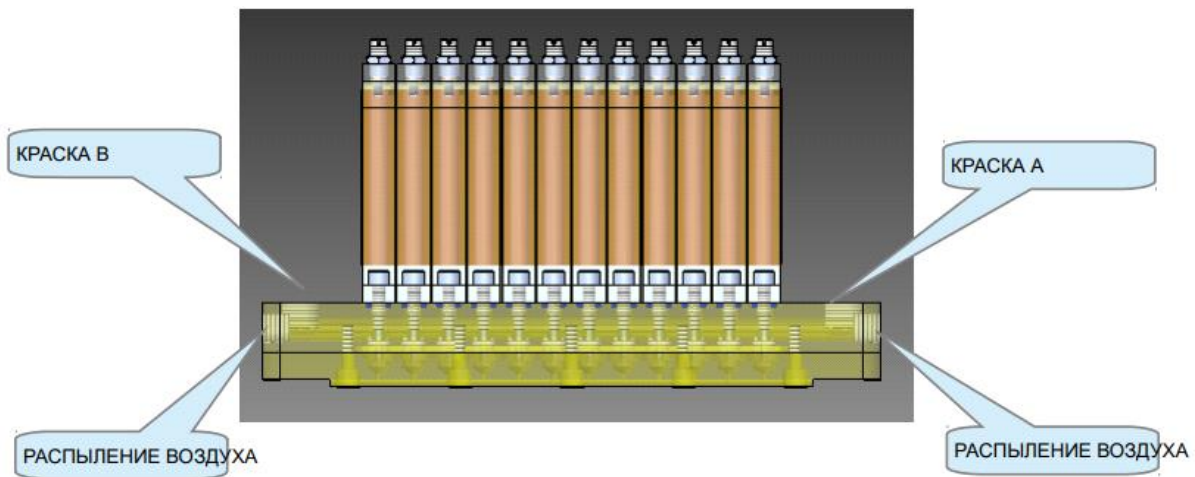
Inlet and outlet of marking head with 12 sprayers
